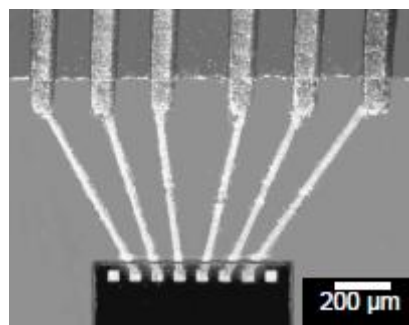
Packaged MEMS sensor in its respective package using aerosol deposition (Figure taken from Sturm, H., et al. [15]).
